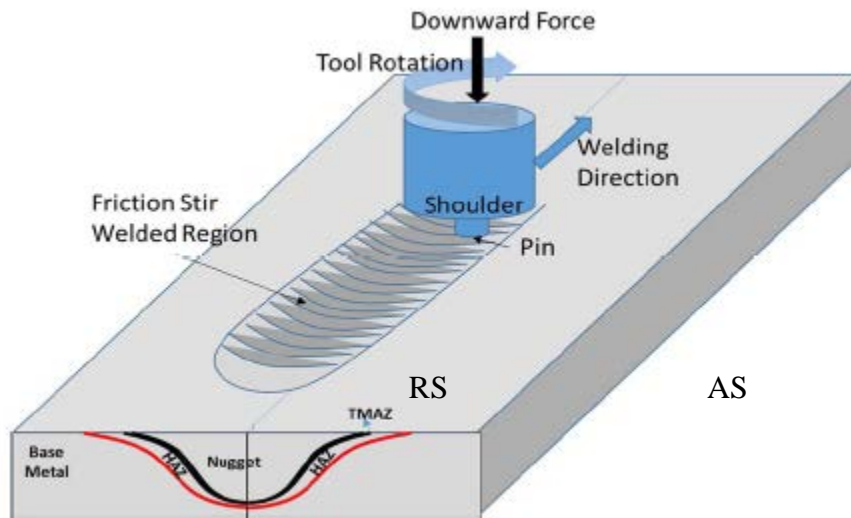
Schematic of friction stir welding process [22]
